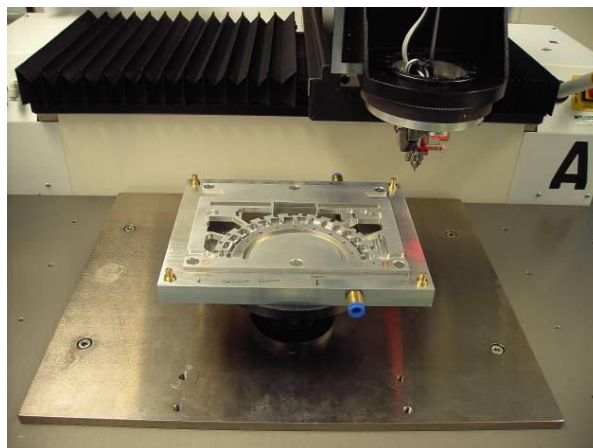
Photograph of the LHCb jig mounted on the H&K 710 bonding machine chuck
